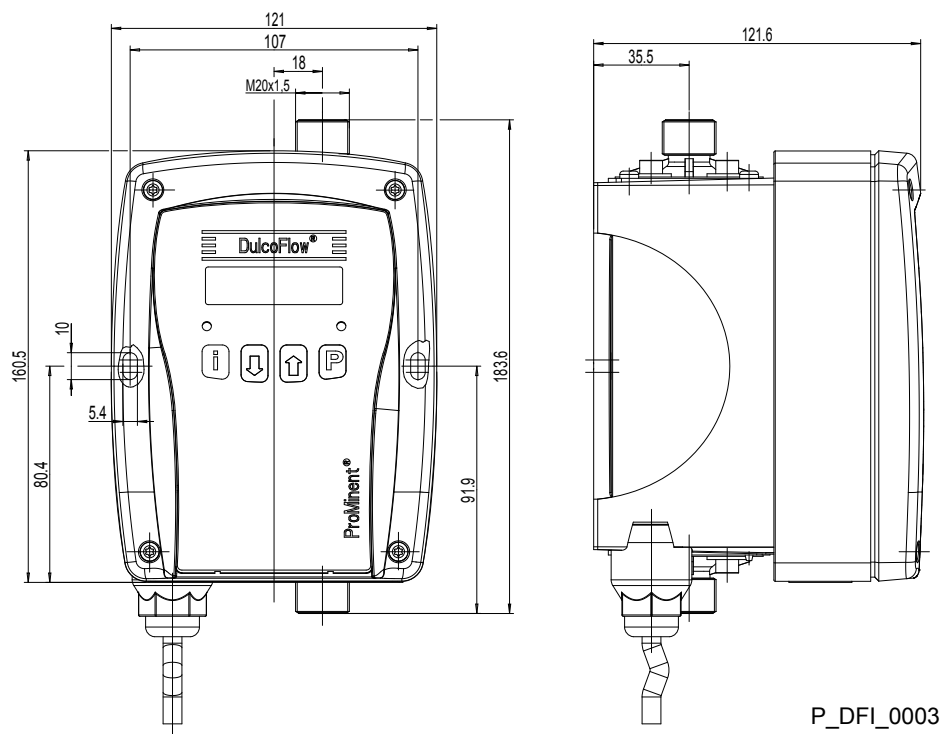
Dimensional drawing DulcoFlow® - dimensions in mm
